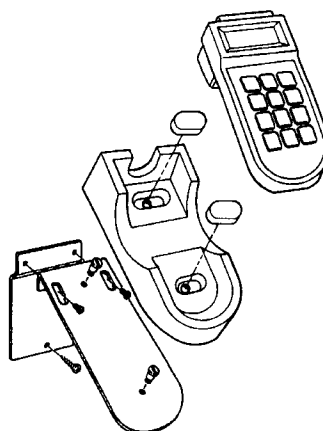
PIN Pad 101 Mount Components (Exploded View)
